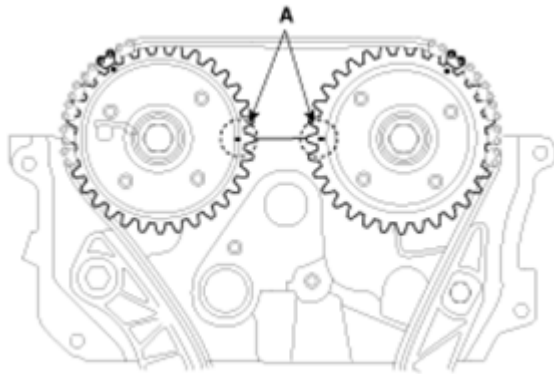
Identifying Mark Of Camshaft Timing Sprockets
